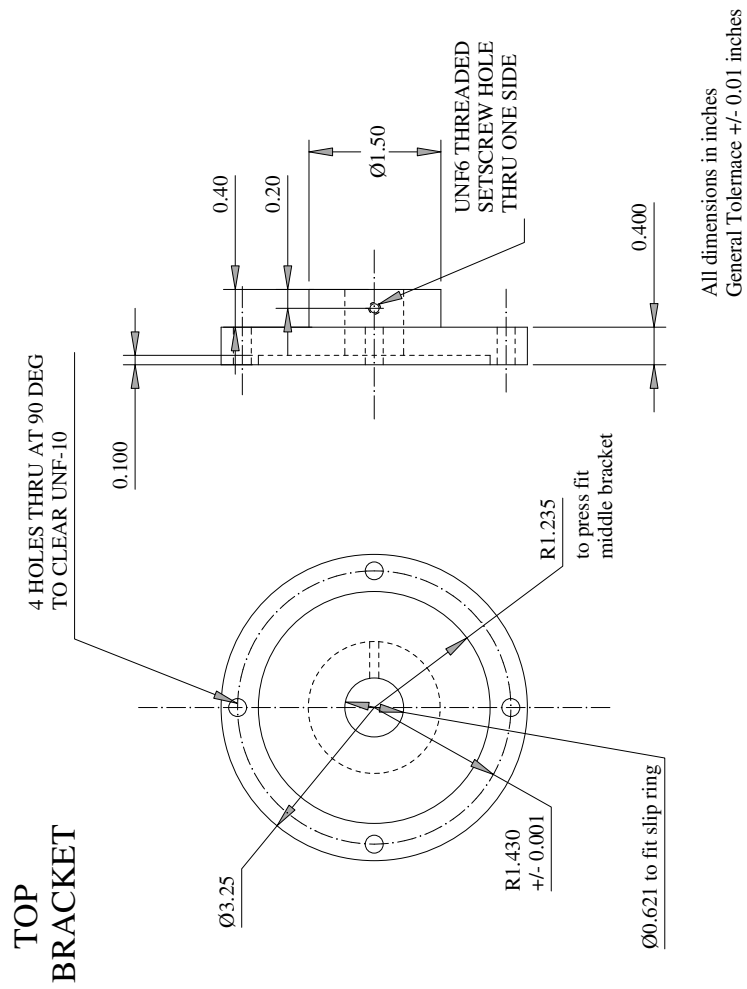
Portion of the three part torque sensor bracket housing the slip ring.
